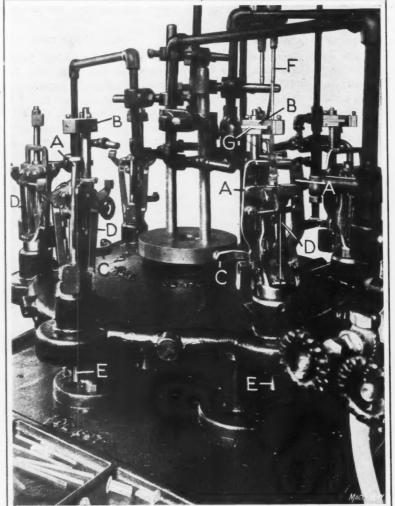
Machine for assembling Internal Glass Parts and Lead Wires of the Lamp
